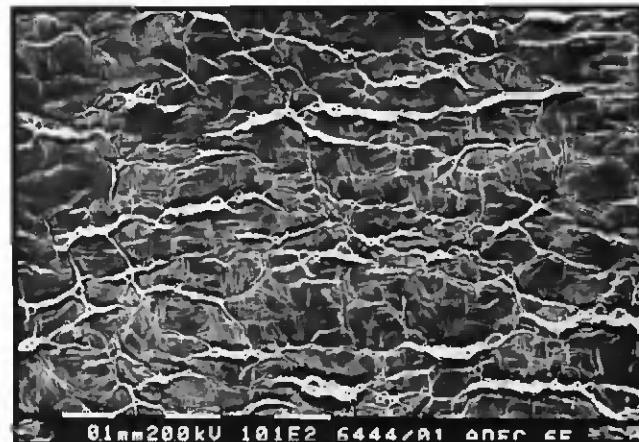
Weld interface surface after fracture, cold roll welding Al-steel with one-sided electroless Ni plating on steel surface (ADFC),  $Y = 0.603$ .
